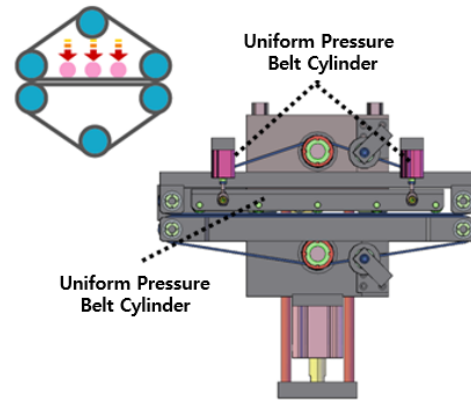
New design using uniform pressure belt cylinder to reduce the belt slip
